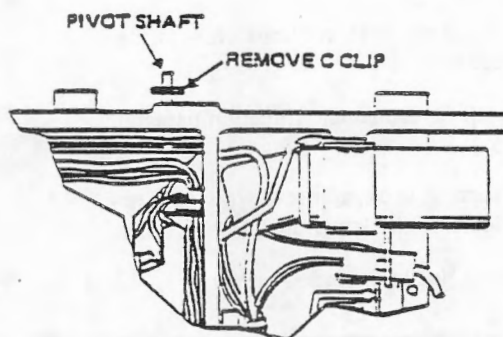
CARTRIDGE GUIDE REMOVAL
